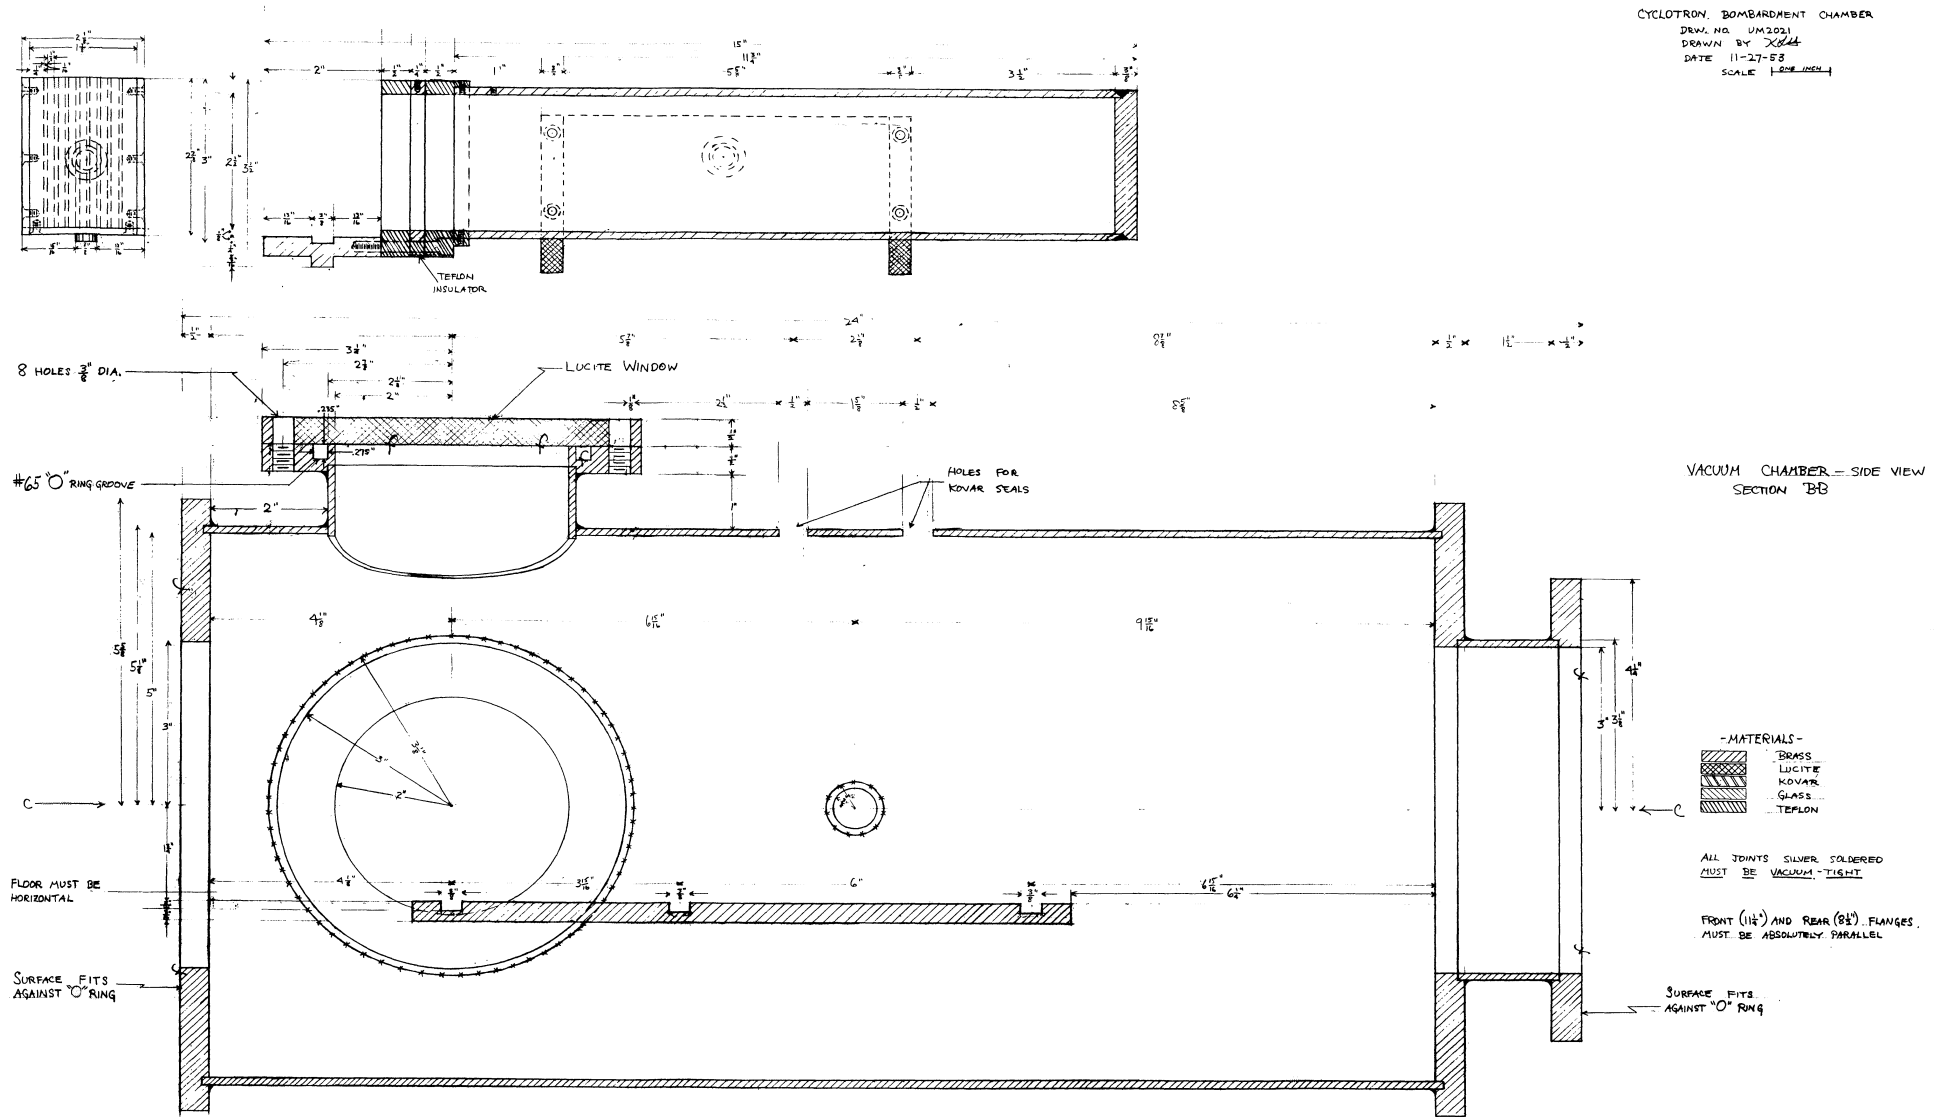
Machine drawing of the cyclotron bombardment chamber - side view.
